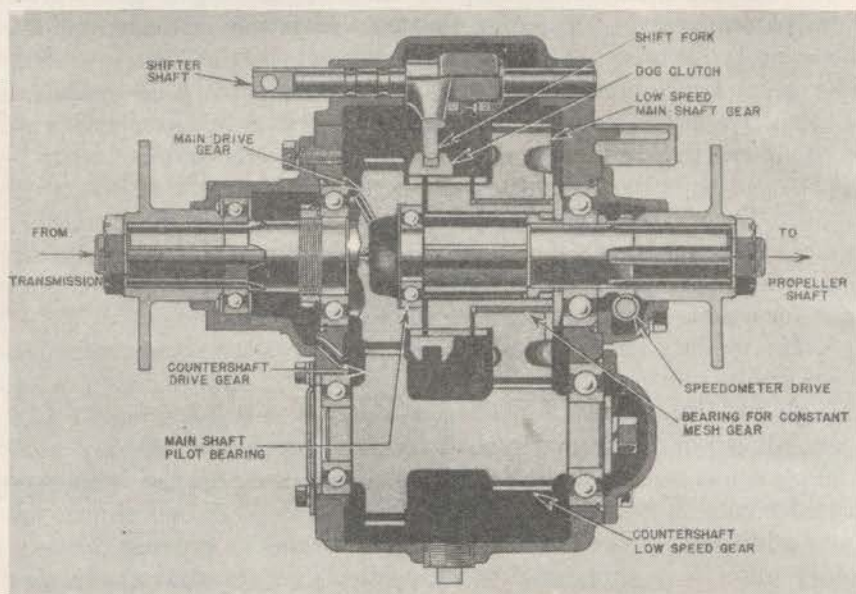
Sectional view of auxiliary transmission showing gear arrangement.
